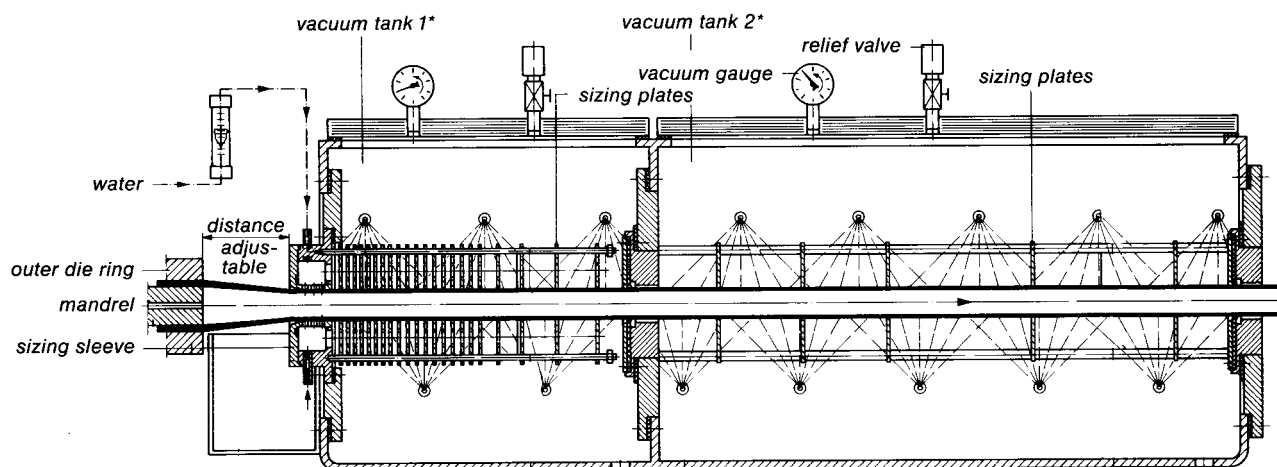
Vacuum sizing tank used for pipe and tube extrusion.
